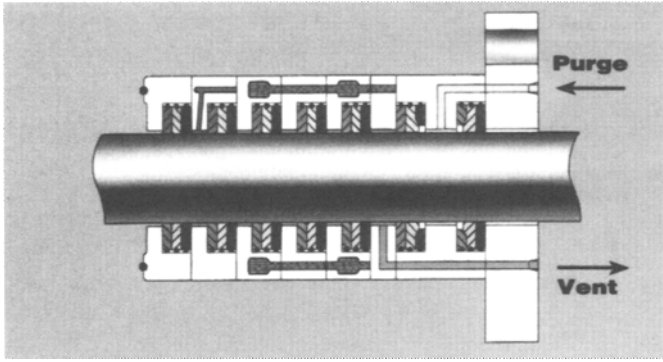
Piston Rod Packing. To meet the latest environmental requirements for controlling packing gas leakage, special buffer gas sealing rings are installed in place of conventional. The packing design includes two sets of wedge rings with an inert buffer gas between them. The spring load on the rings forces them to slightly wedge in the cup. Two individual wedge rings seal the buffer gas in both directions. Packing cups with passages for lubrication, coolant, and venting are provided as required by the application and API 618. Packings can be supplied with special gasket designs if stringent emission requirements exist. (Used by permission: Bul. 85084, ©1992. Dresser-Rand Company.)
